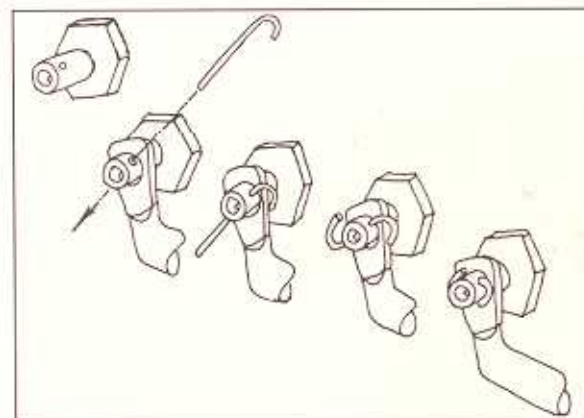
Atlas Axle with tube and piston held together by cotter pin.
